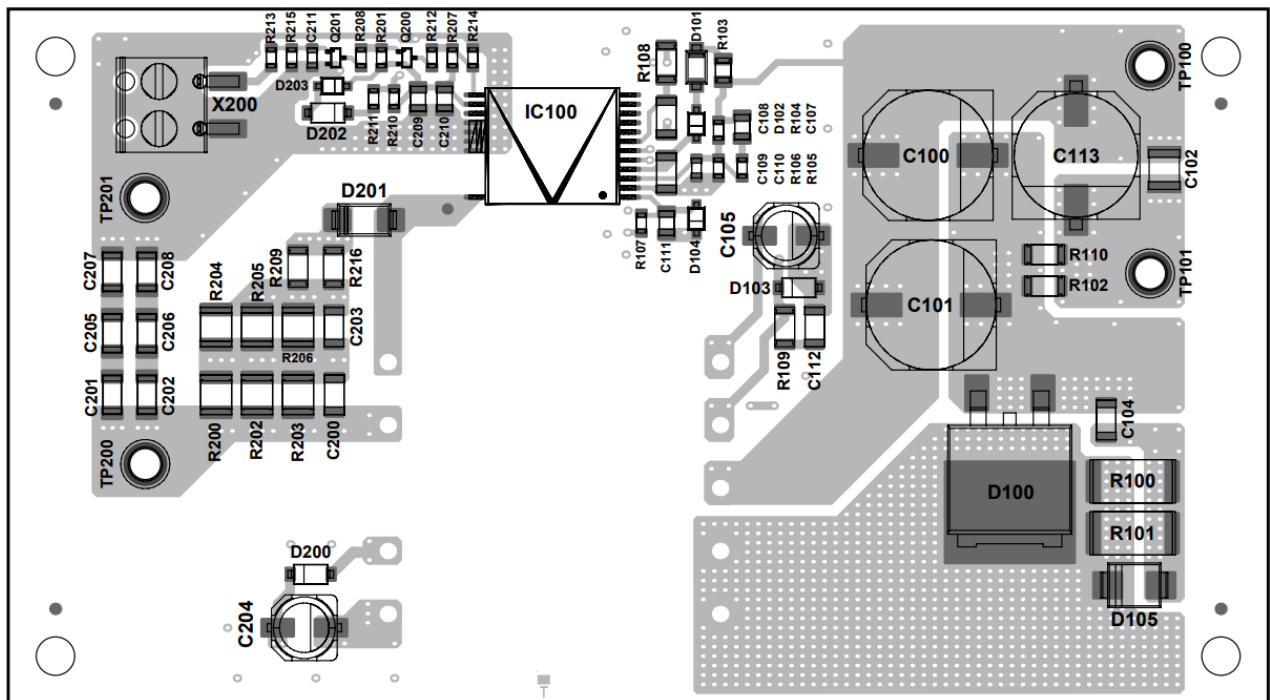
RDR-1074Q PCB Assembly (no bottom components).
